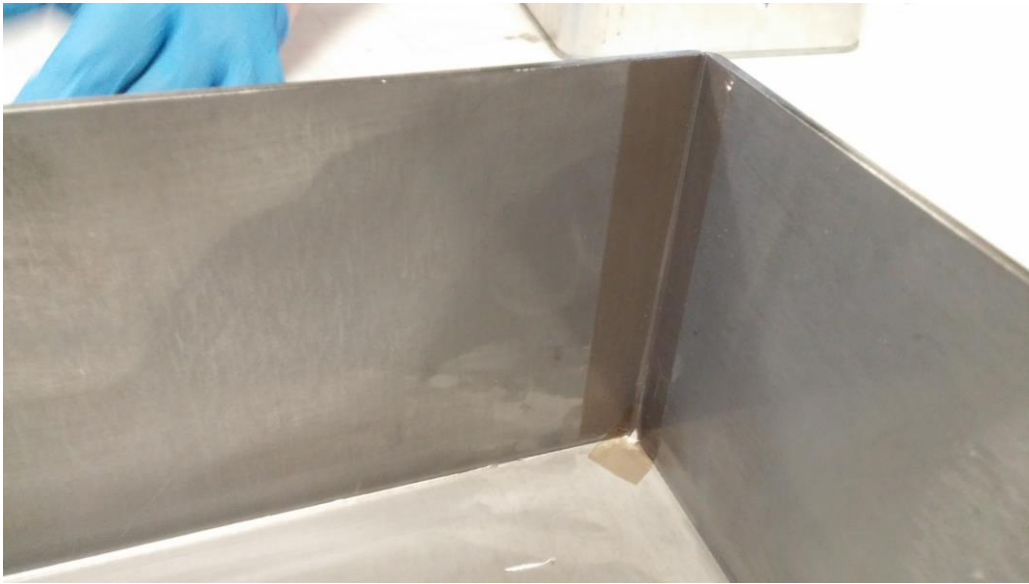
Tape should be used at the corners where cracks are in the mold.
